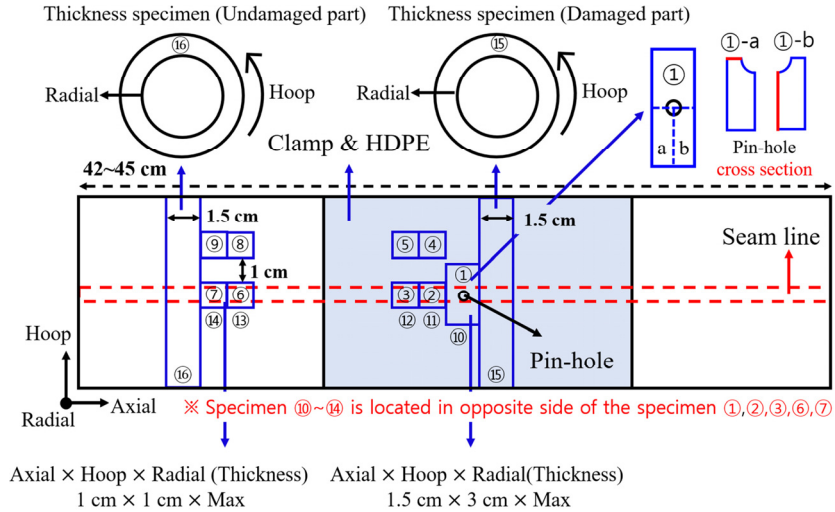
Measurement positions and sample dimension for failure analysis on corroded heat-transport pipe.
